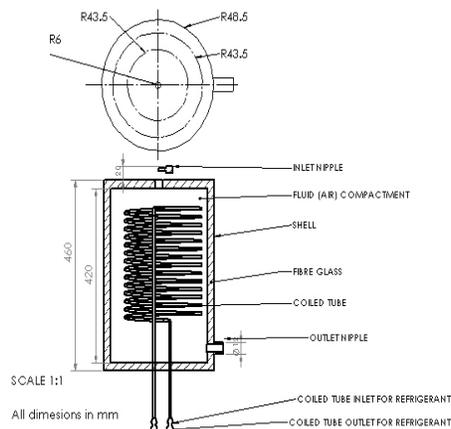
A cross –section of the shell and coiled tube heat exchanger
